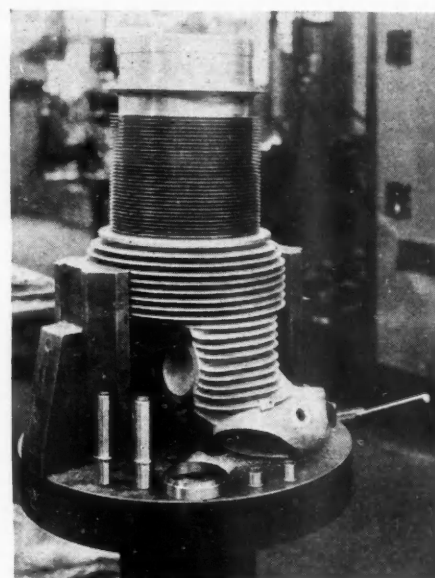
Fixture on which cylinder head and barrel are assembled. Note bronze inserts + + + + +
